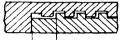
SCREWED AND SOCKETED BUTT JOINTS WITH V-THREAD TAPER SCREWING
